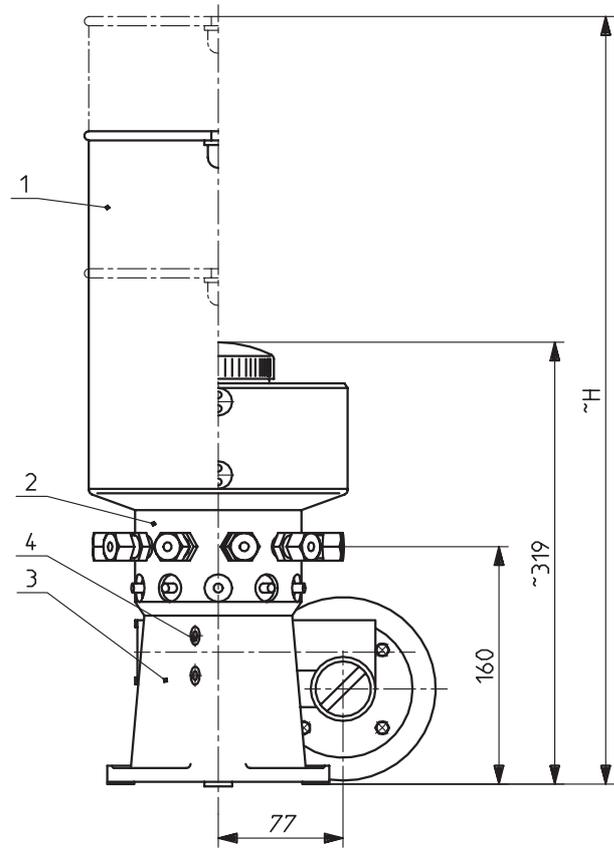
Grease and oil lubrication pump with drive and additional reduction gear of MPS 10-C type
